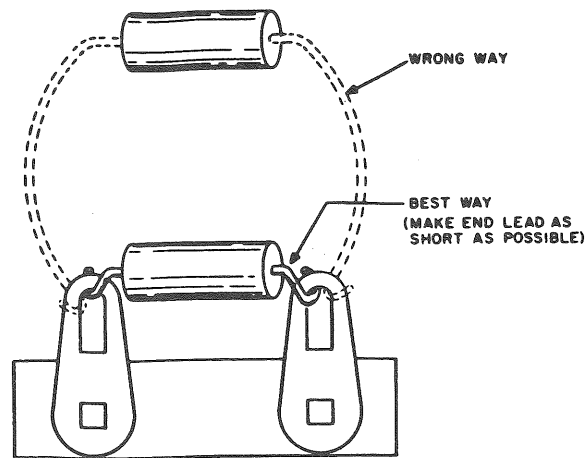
THE BEST WAY TO MOUNT A COMPONENT
